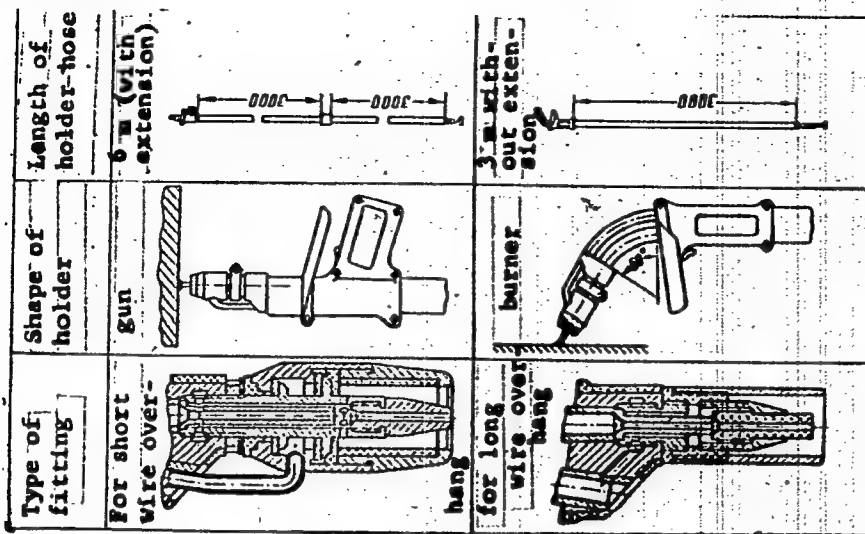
, a. Variants of accessories for IaNIITMASh-designed standardized semiautomatic welding machines
